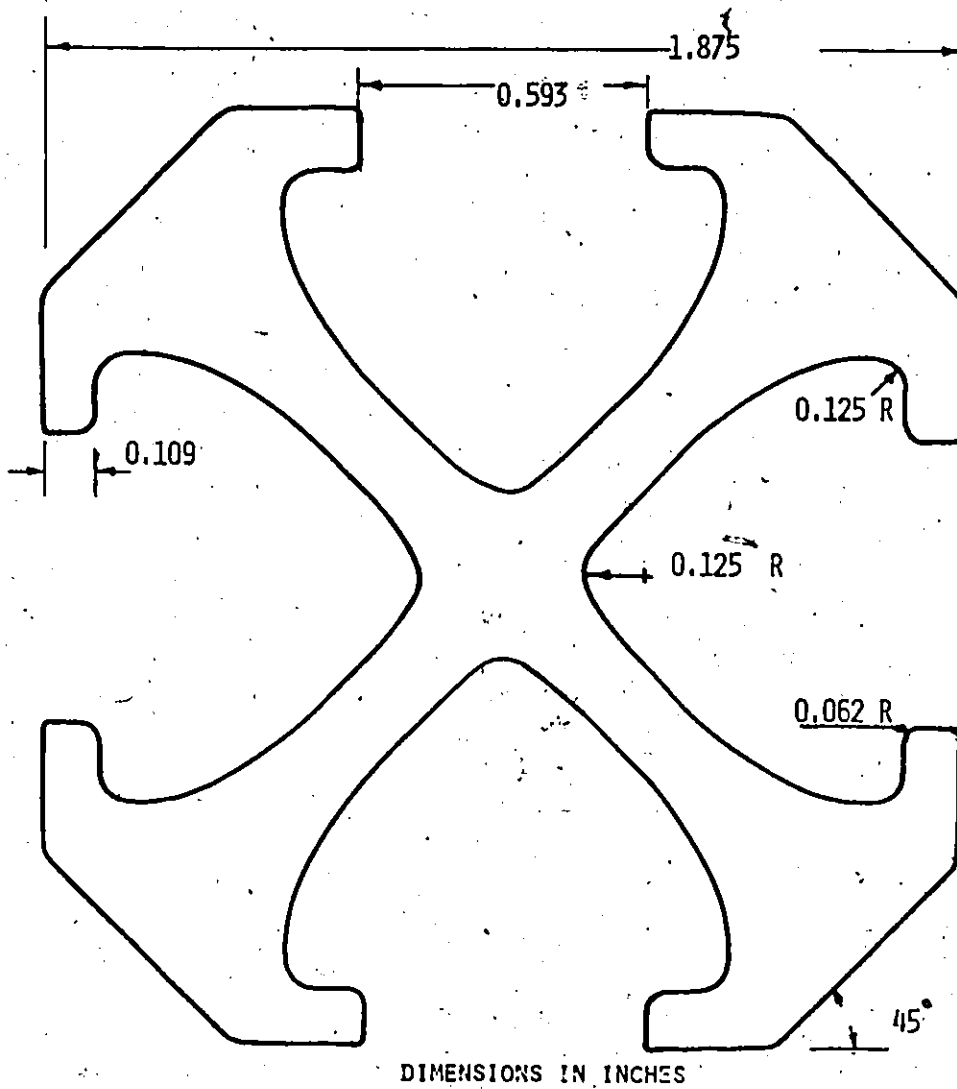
DIMENSIONS OF FINAL DESIGN OF OPTIMIZED
